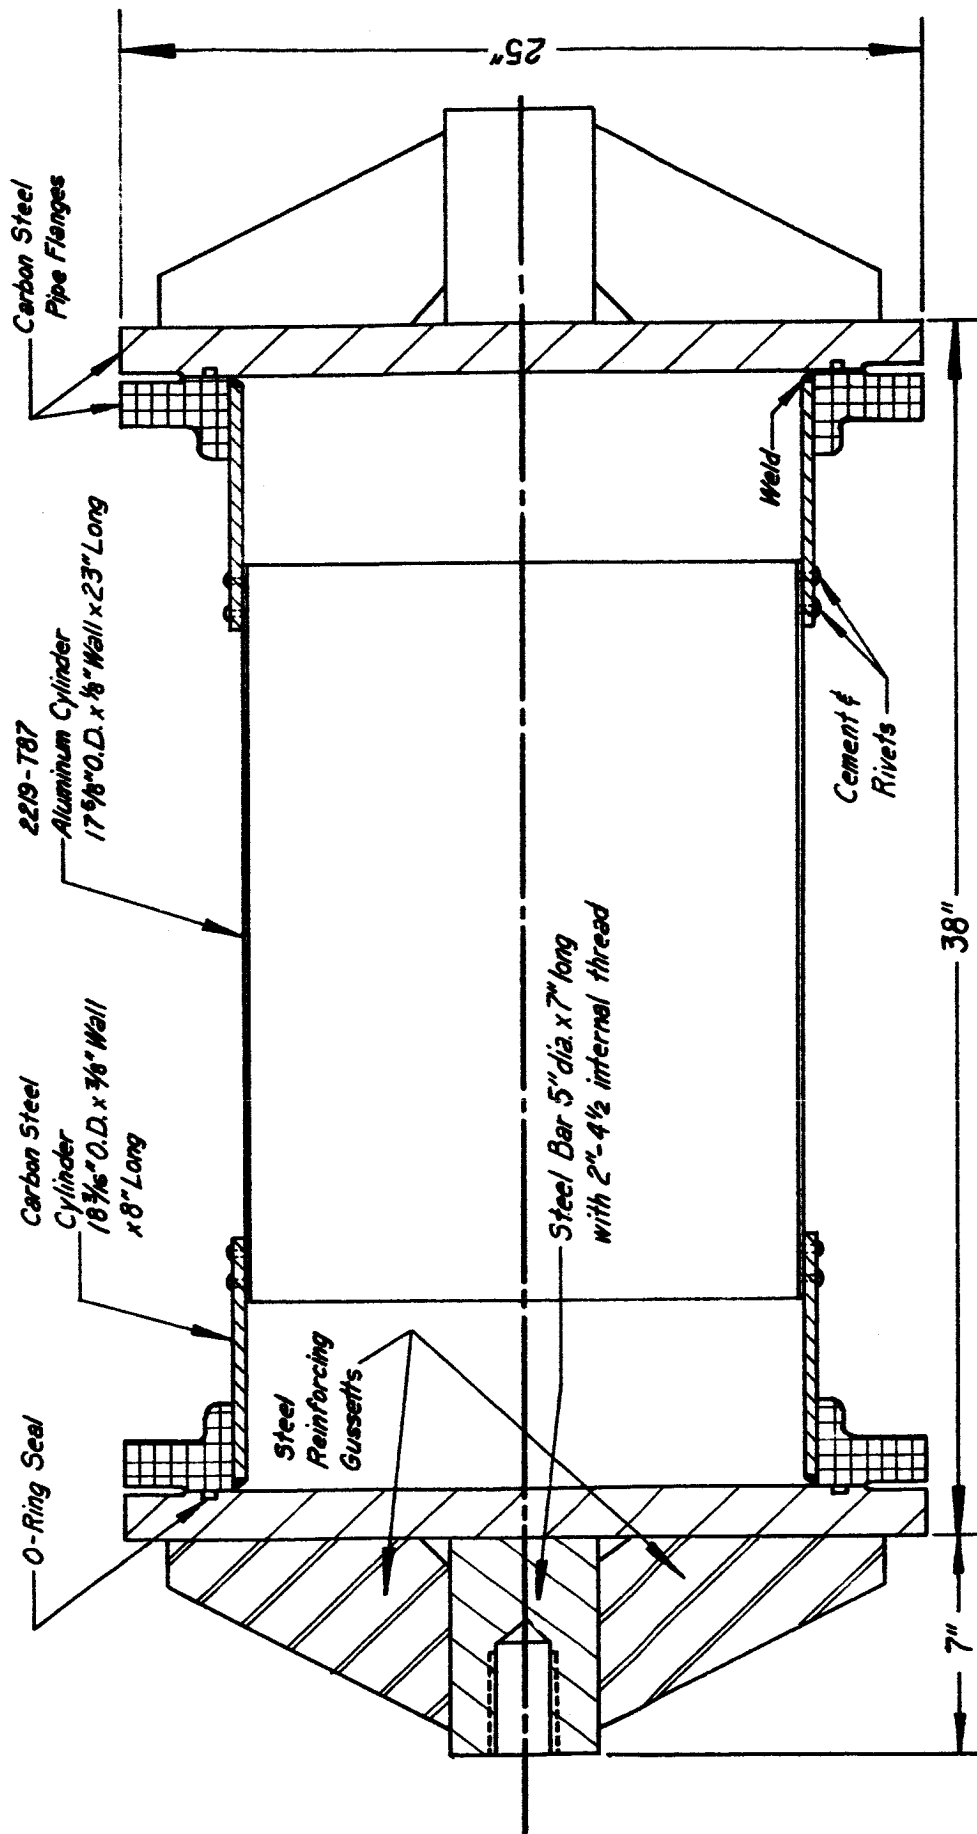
REDESIGNED TEST CYLINDER AND CLOSURE FIXTURE ASSEMBLY
